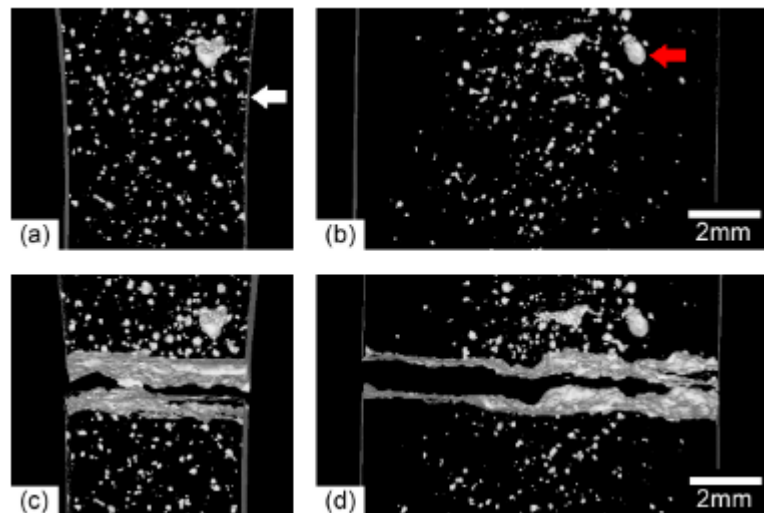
Reconstruction of porosities in a cast aluminium alloy (a) frontal view and (b) side view in the as-received state, and (c) frontal view and (d) side view post-test [131].
